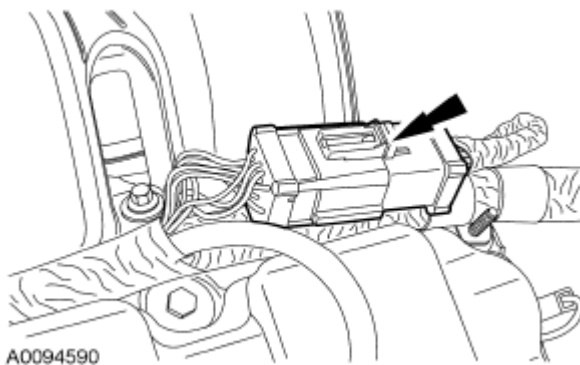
Locating Fuel Charging Wiring Harness Electrical Connector
